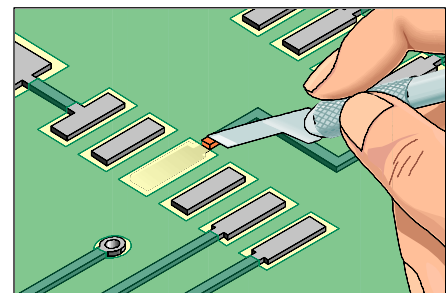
Remove the defective pad and remove soldermask from the connecting circuit.
